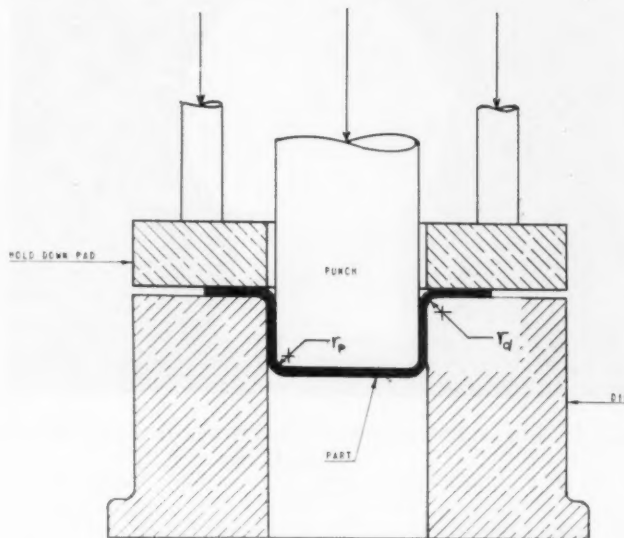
TYPICAL DRAW-DIE ARRANGEMENT
